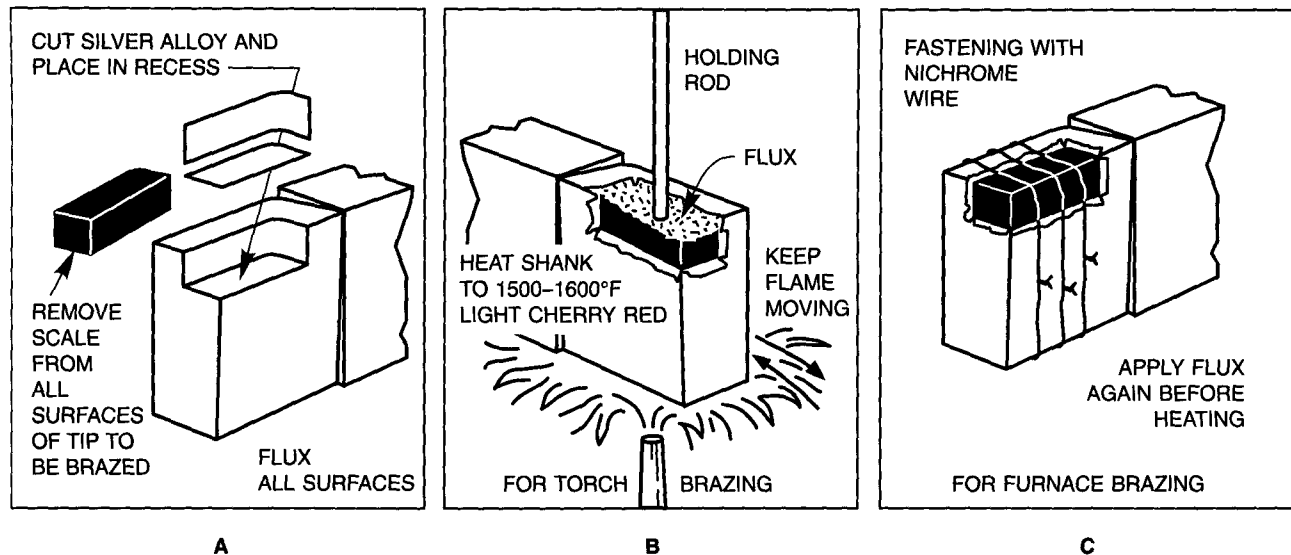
Steps in the Brazing of Carbide Tipped Tools
